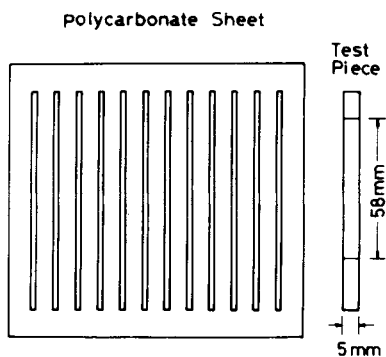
Uniform preparation of test pieces from sheet for low- and high-speed tensile testings.
